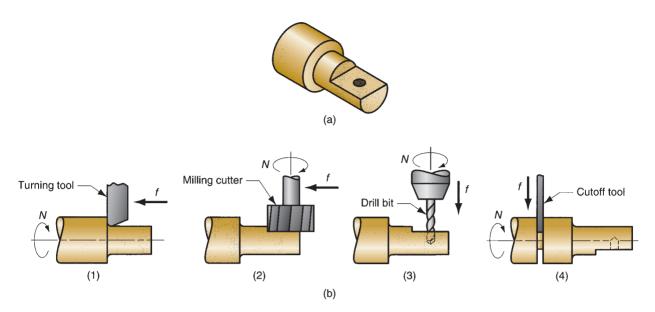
Operation of a mill-turn center: (a) example part with turned, milled, and drilled surfaces; and (b) sequence of operations on a mill-turn center: (1) turn second diameter, (2) mill flat with part in programmed angular position, (3) drill hole with part in same programmed position, and (4) cutoff.
